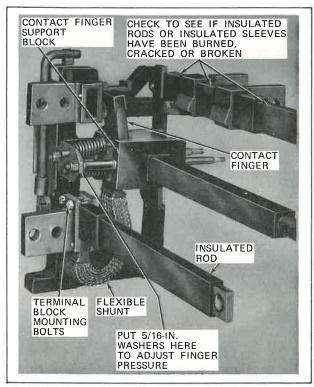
LOWER END FRAME AND PARTIAL ASSEMBLY OF CONTACT AND SUPPORT PARTS.
